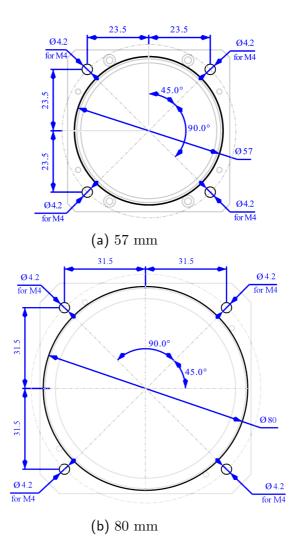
Instrument panel cutout and mounting hole. Note: Figure is not in scale.
